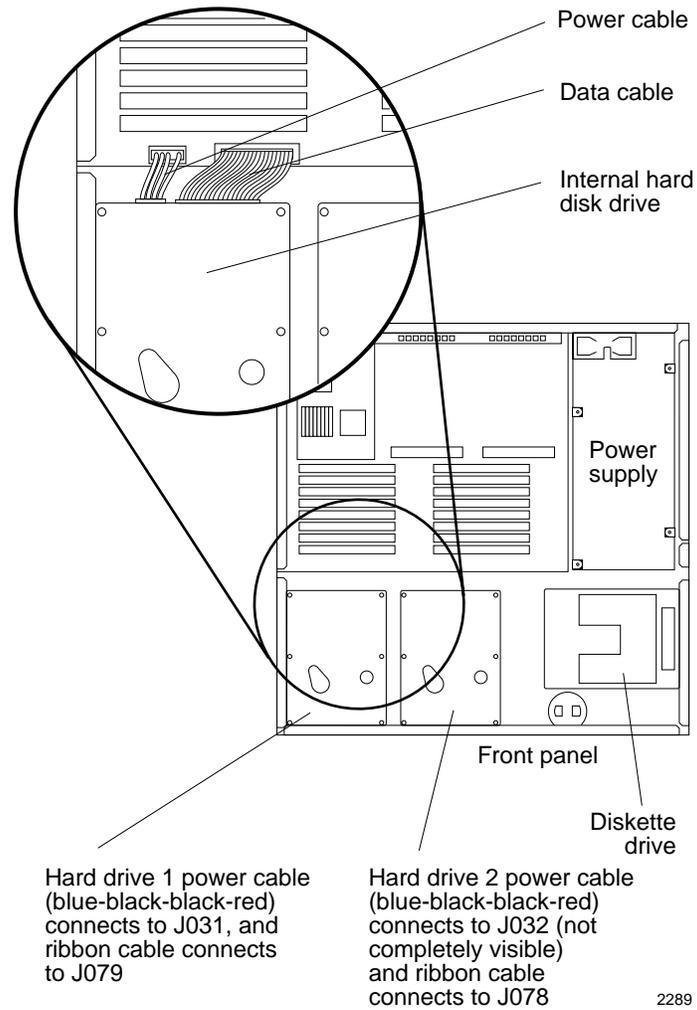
Connecting Power and Data Cables to the Hard Disk Drive
